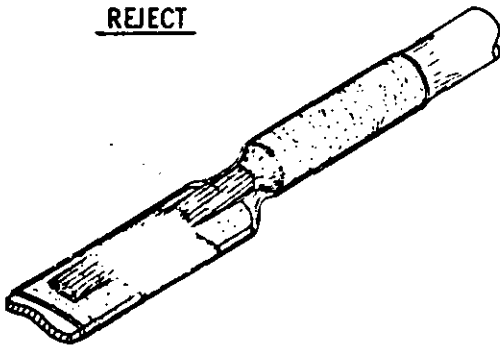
Heat shrinkable solder devices - connector terminations.
